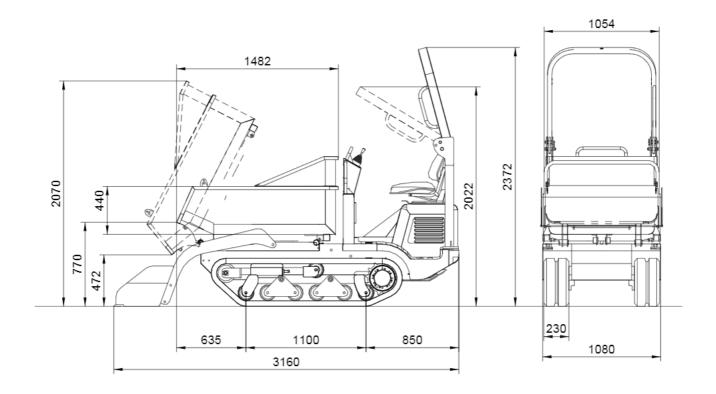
Machine dimensions (model DT15 with earth-movement skip)
